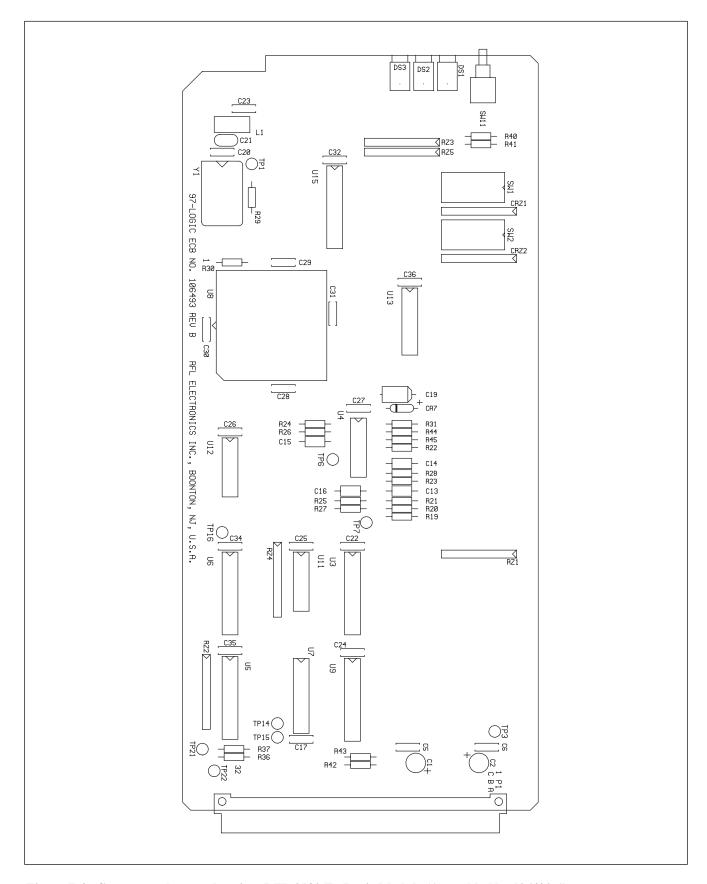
Component locator drawing, RFL 9780 Tx Logic Module (Assembly No. 106490-1)
